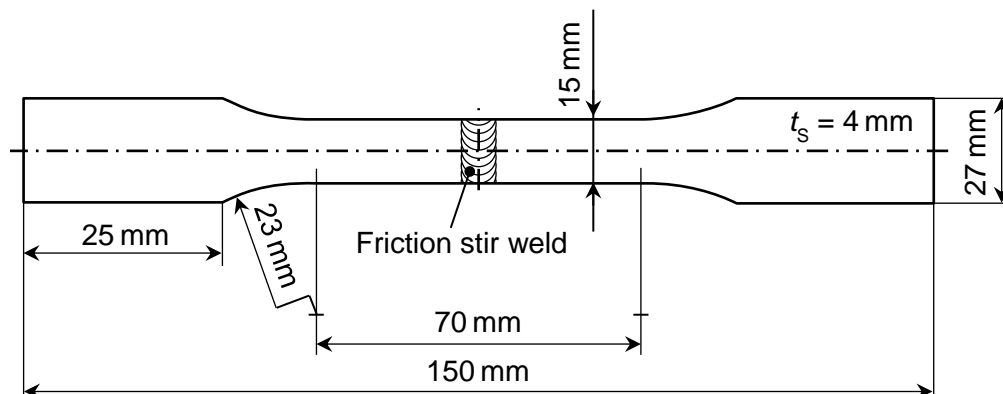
Geometry and dimensions of the tensile specimens (based on DIN 50125)
